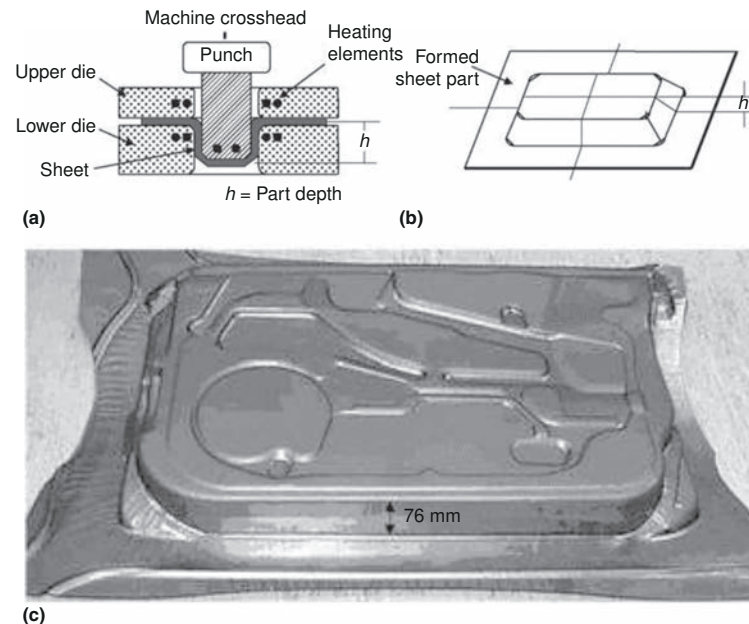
Heated die system for warm stamping of aluminum alloys. (a) Schematic diagram of warm forming dies. (b) Schematic of formed sheet part. (c) Chrysler Neon door inner panel successfully formed at 350 °C (660 °F) using aluminum alloy 5182 plus manganese sheet. Source: Ref 7
